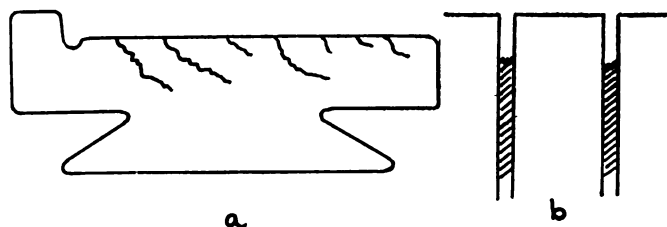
Results of using raking tool when undercutting commutator mica. (a) Cracks in mica. (b) Ragged mica at bottom of slot.
